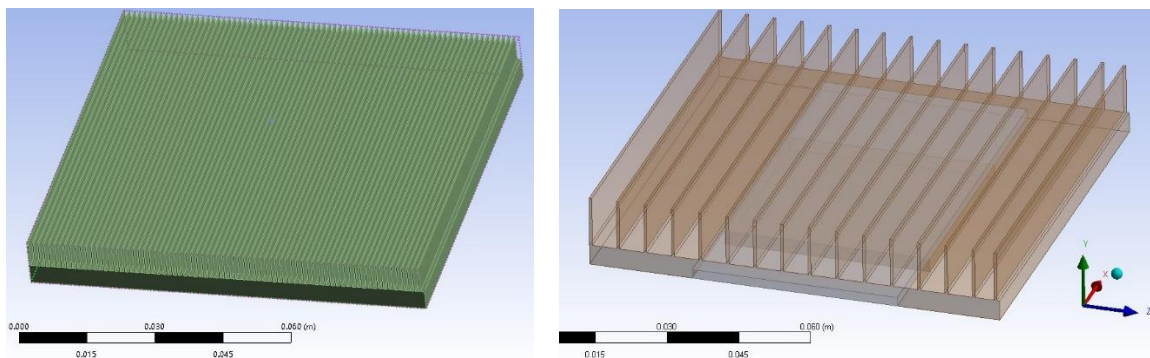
3D geometry of copper heat sink and ‘reduce cost’ aluminum heat sink
